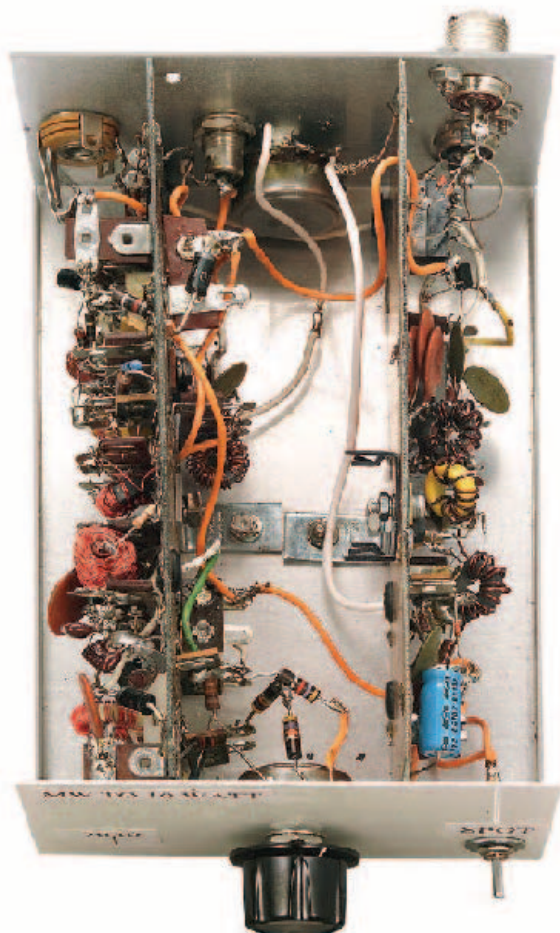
View of the inside of the Modified MouseFET showing construction layout.
